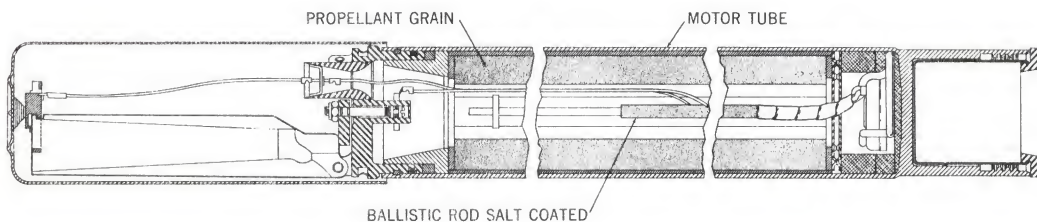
2.75-Inch Rocket Motor Mk 4 Mod 8, Sectional View.
